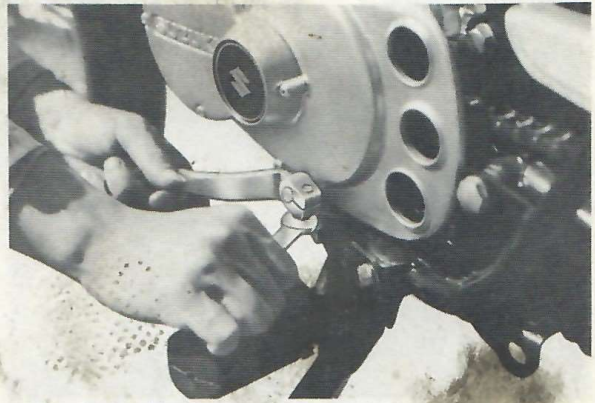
Unscrewing gear shifting lever fitting bolt
